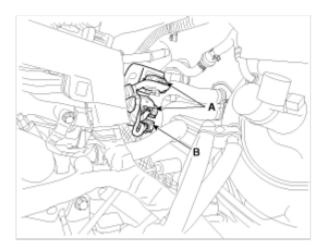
Identifying Fuel Hose And Purge Control Solenoid Valve Hose Courtesy of HYUNDAI MOTOR AMERICA
